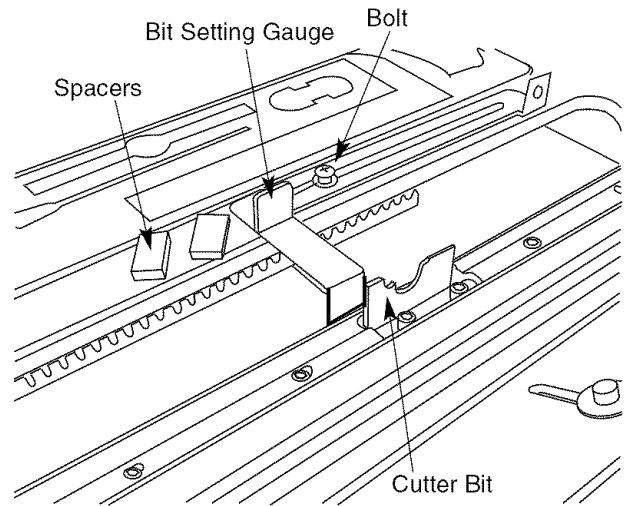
Using the Bit Setting Gauge to Install Cutter Bits
